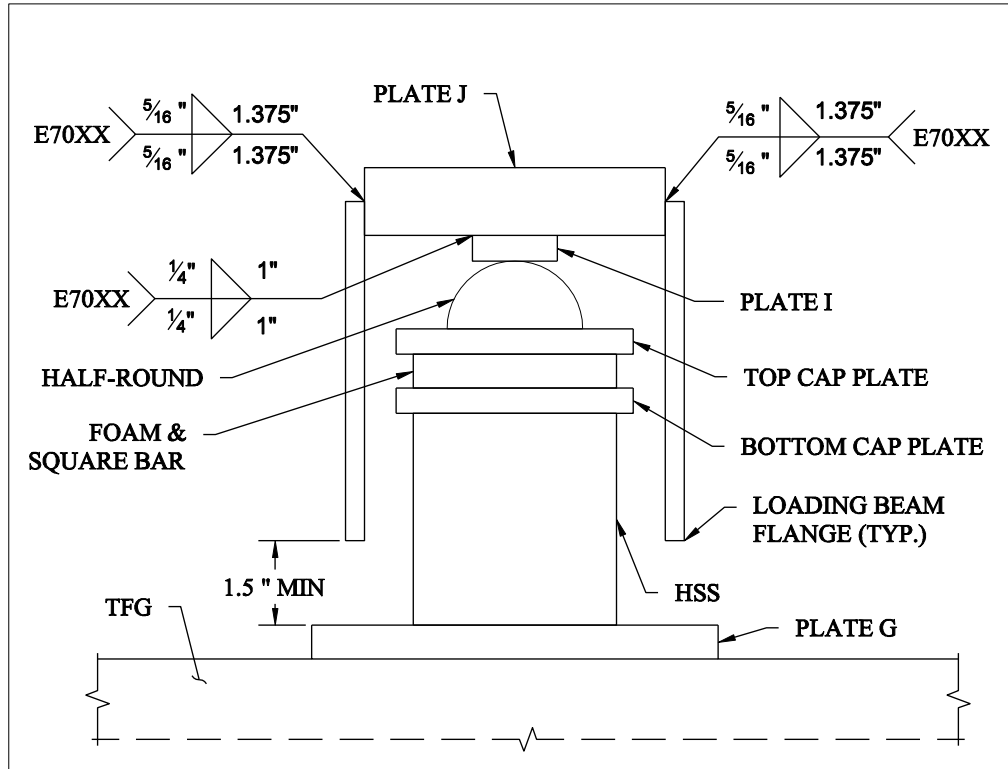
Section B-B of Figure 5.3 - longitudinal plane cross section view of load bearing assembly at Section B
